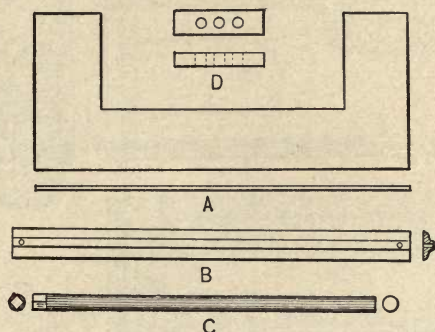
Casting Details of Small Galvanizing Kettle.
